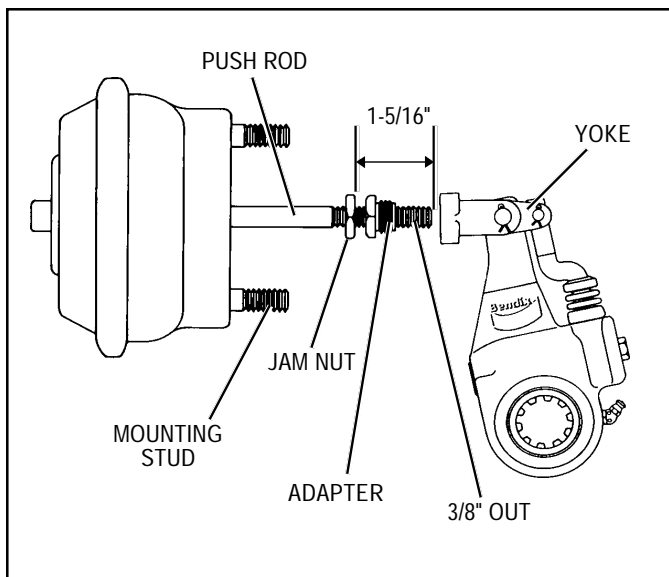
EASY-ON YOKE ASSEMBLY
